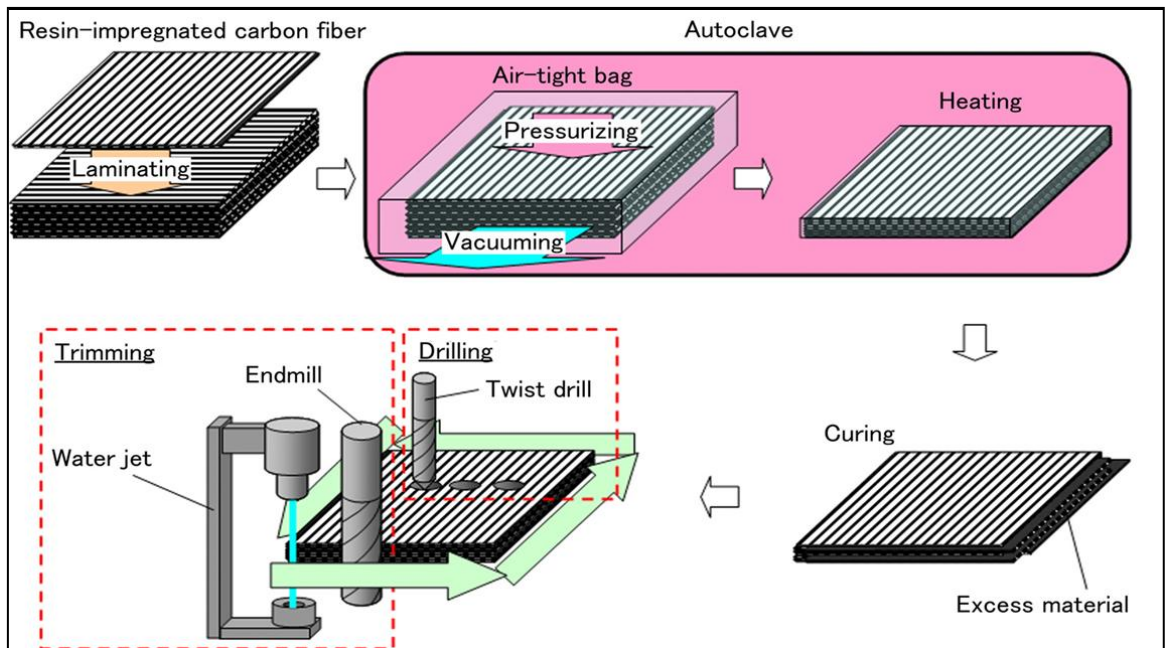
Process to manufacture CFRP (Auto-clave molding)
